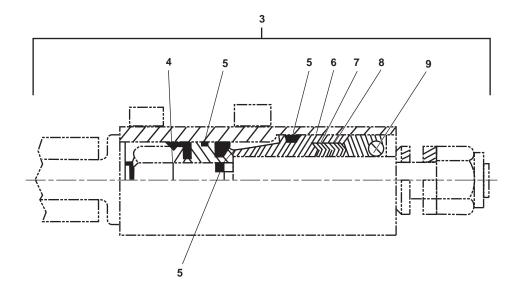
Hydraulic Watertight Doors (Sheet 2 of 9)
